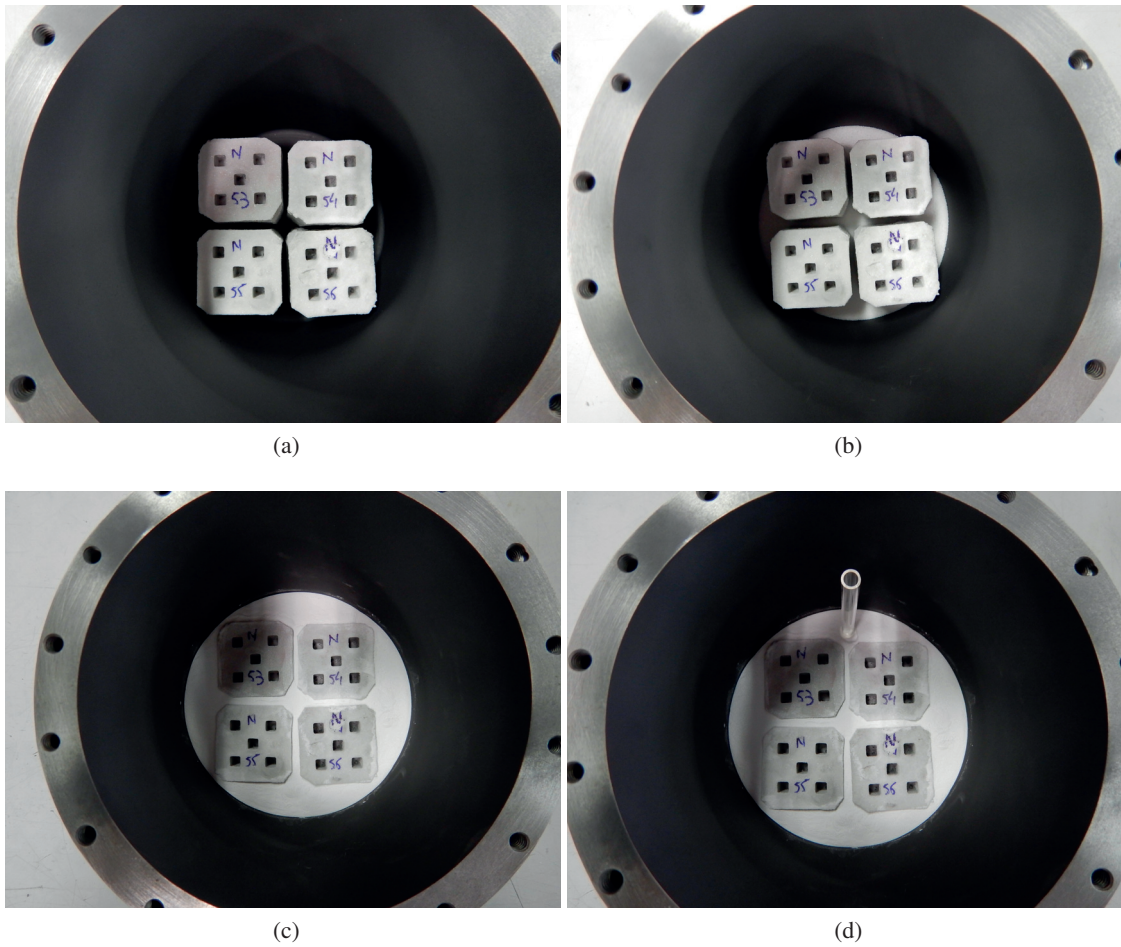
Positioning and preparation of the molds into the casting chamber before infiltration. (a) Placing of the molds inside the chamber, (b) pouring of a 1 cm layer of large grain size salt (above 0.4mm), (c) chamber filled with finer grain size (below 0.125 mm) and (d) glass tube to protect the thermocouple
